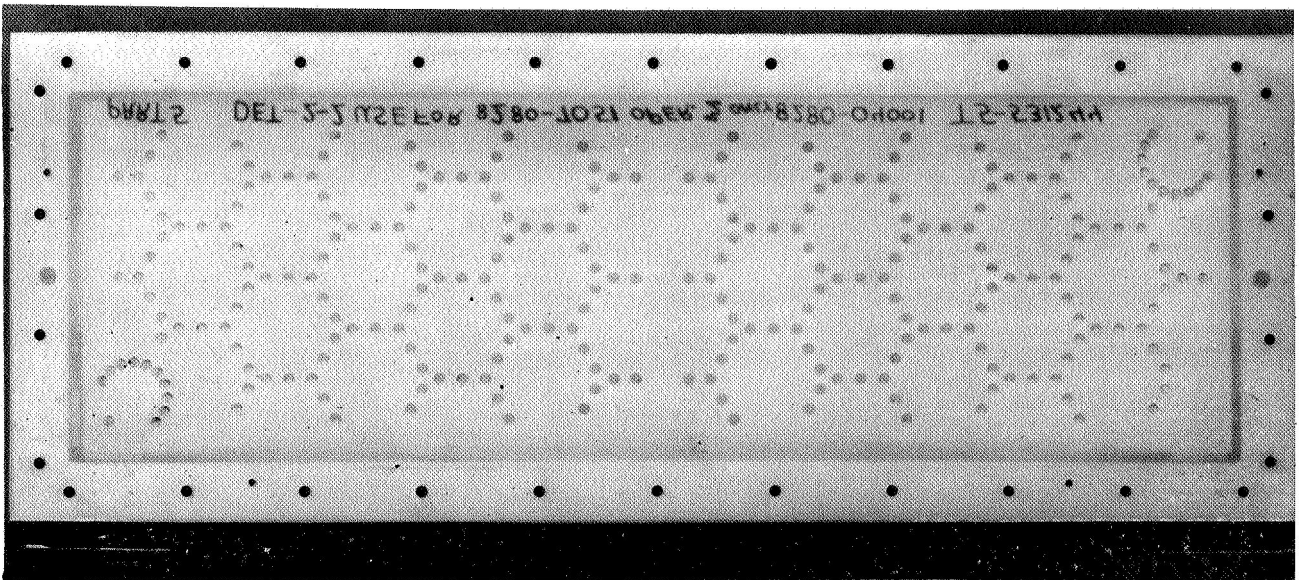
Vinyl Spot Welding Template, 12x40 in.
